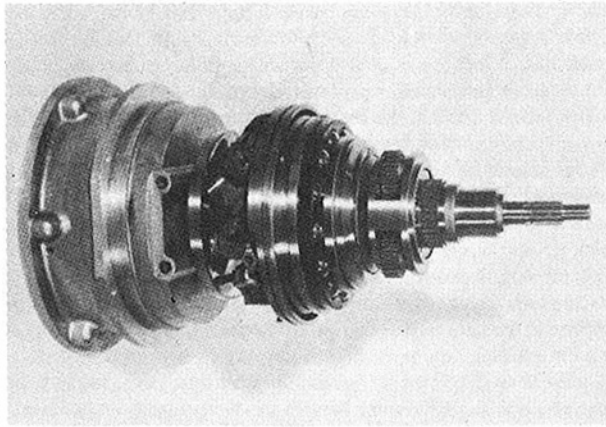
Simple epicyclic train after-gearing behind an 80 mm single-sided rolling assembly
